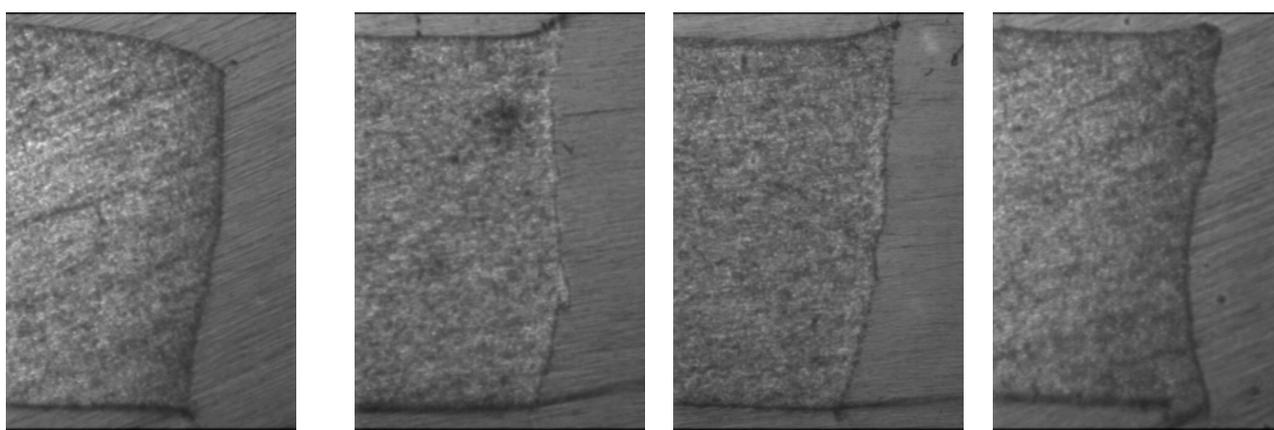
shows the appearance photograph of cut surface from A direction in Fig. 6. The cut surface which is cut by conventional shearing method consists of small area fraction of sheared surface and large area fraction of fractured surface as shown in Fig. 7 (a), and grazing stripe pattern is observed in the vertical direction. In contrast, the cut surface at tool angle $\alpha=30$ degrees or $\alpha=40$ degrees consists of large area fraction of sheared surface and small area fraction of fractured surface as shown in Fig. 7 (b) or Fig. 7 (c). The ratio of sheared surface is significantly larger than that in conventional shearing method. Scratching pattern is observed at tool angle $\alpha=50$ degrees as shown in Fig. 7 (d). The grazing stripe pattern is observed in the horizontal direction corresponding to tool edge motion regardless of variation of tool angle.
